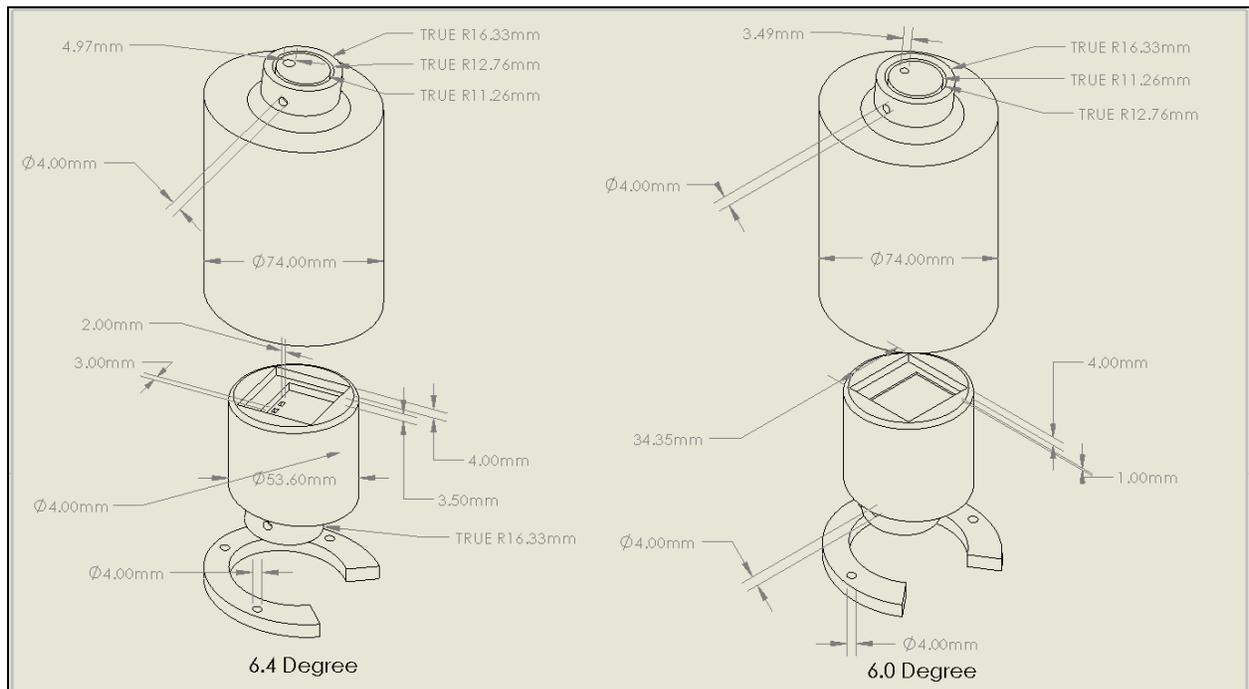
Annotated Solidworks drawing of the Load Sensor Holders (mm).
